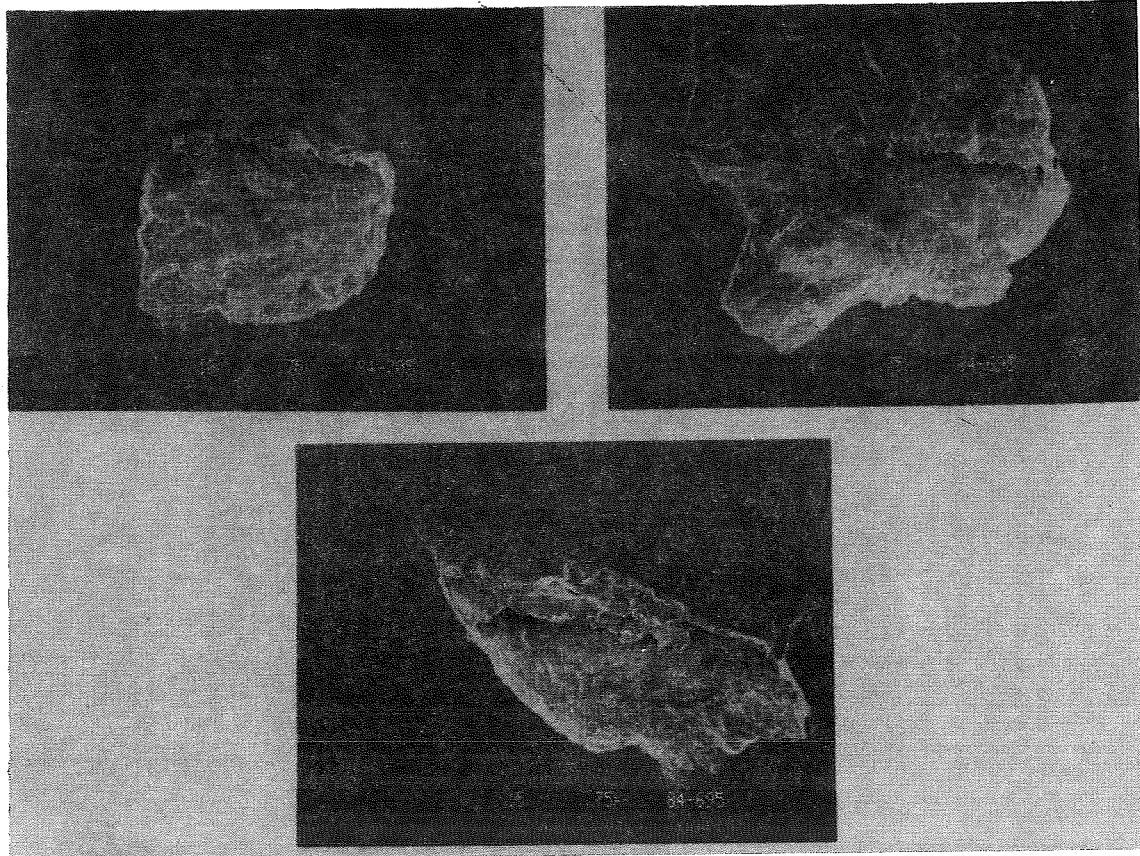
TYPICAL SPALLS IN ION PLATED (NOS. 10, 14) AND UNPLATED (NO. 15) RCF TEST SPECIMENS.
